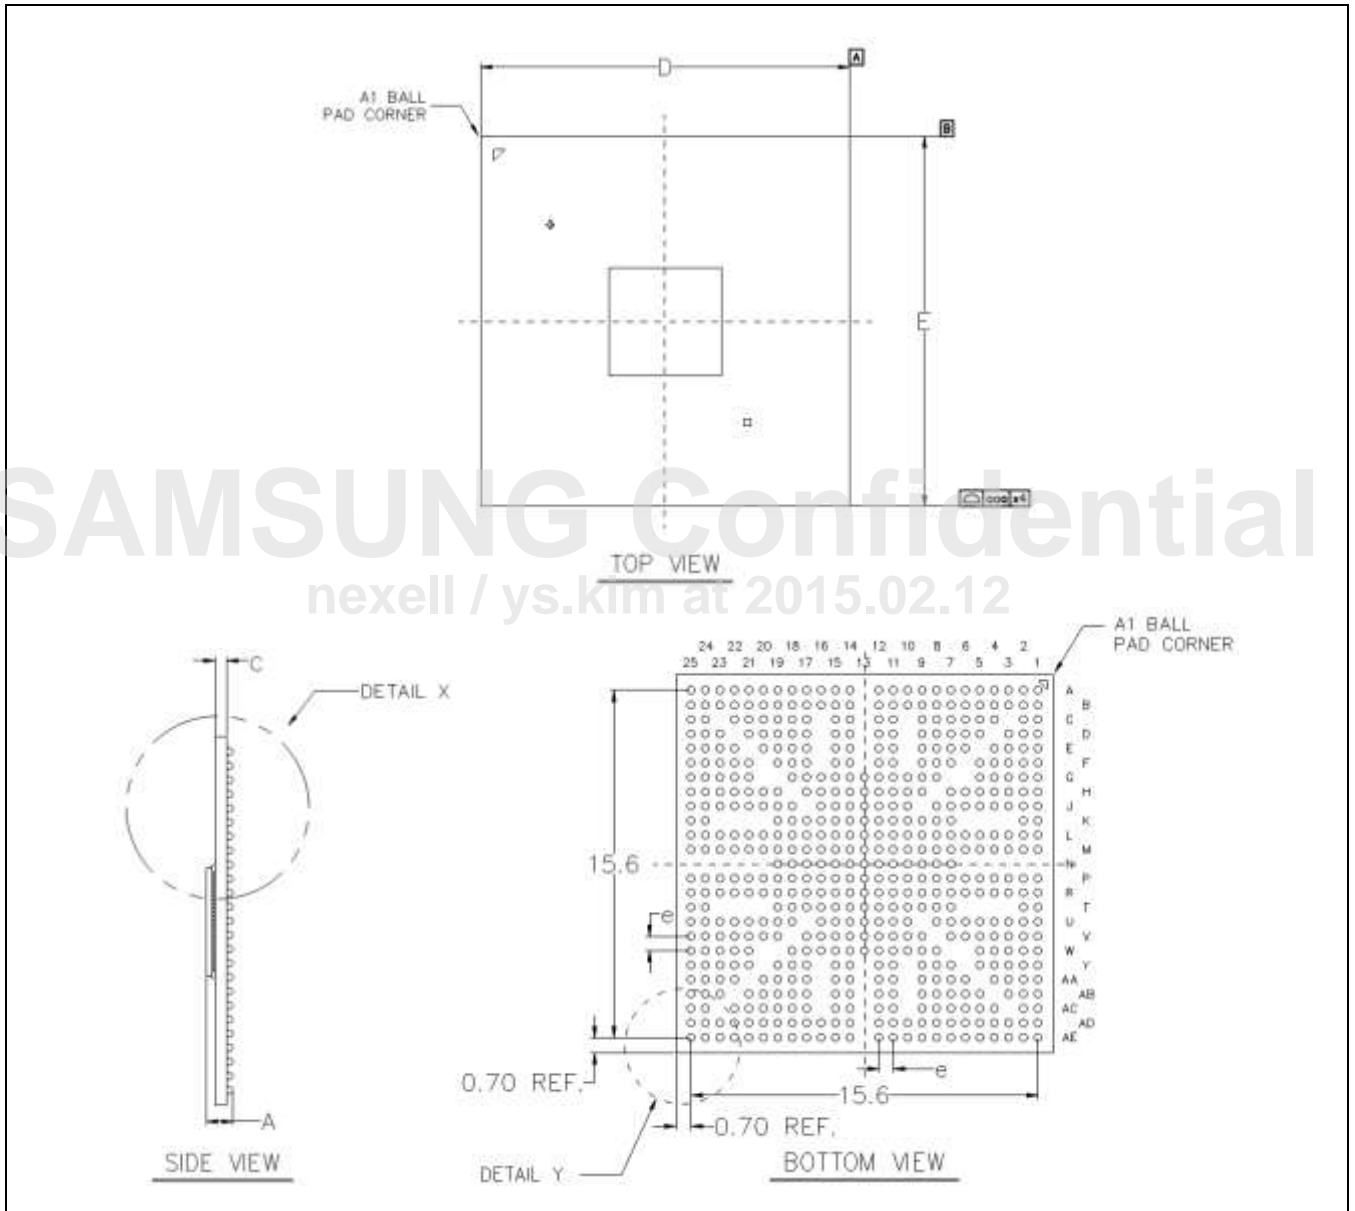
Mechanical Dimension - Top, Side, Bottom View
